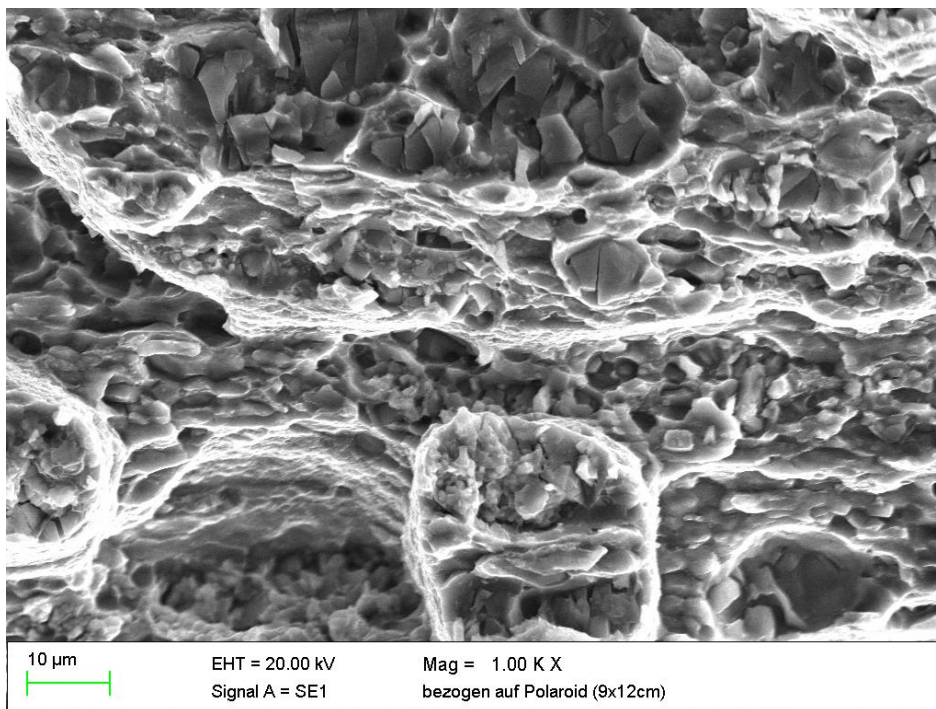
SEM image of the broken specimen: Final forced fracture; microductile fracture with dimples.
